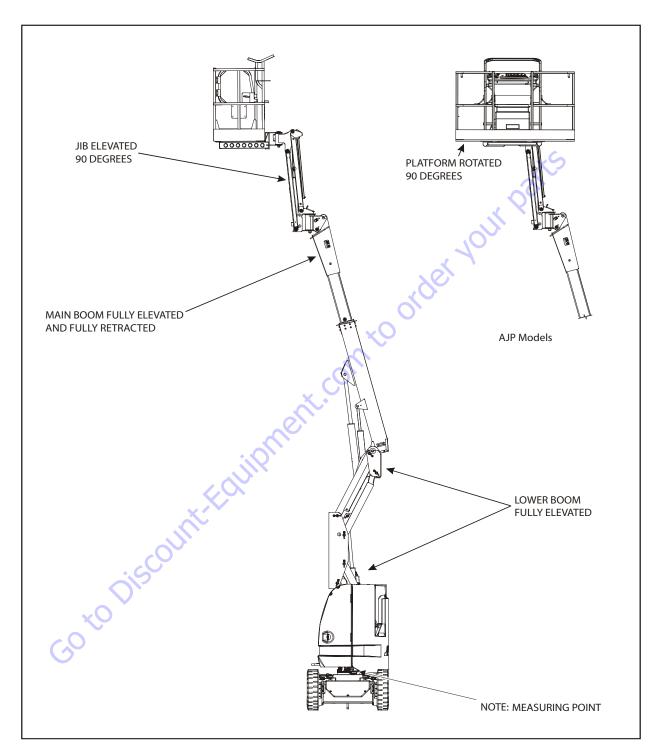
Swing Bearing Tolerance Boom Placement
